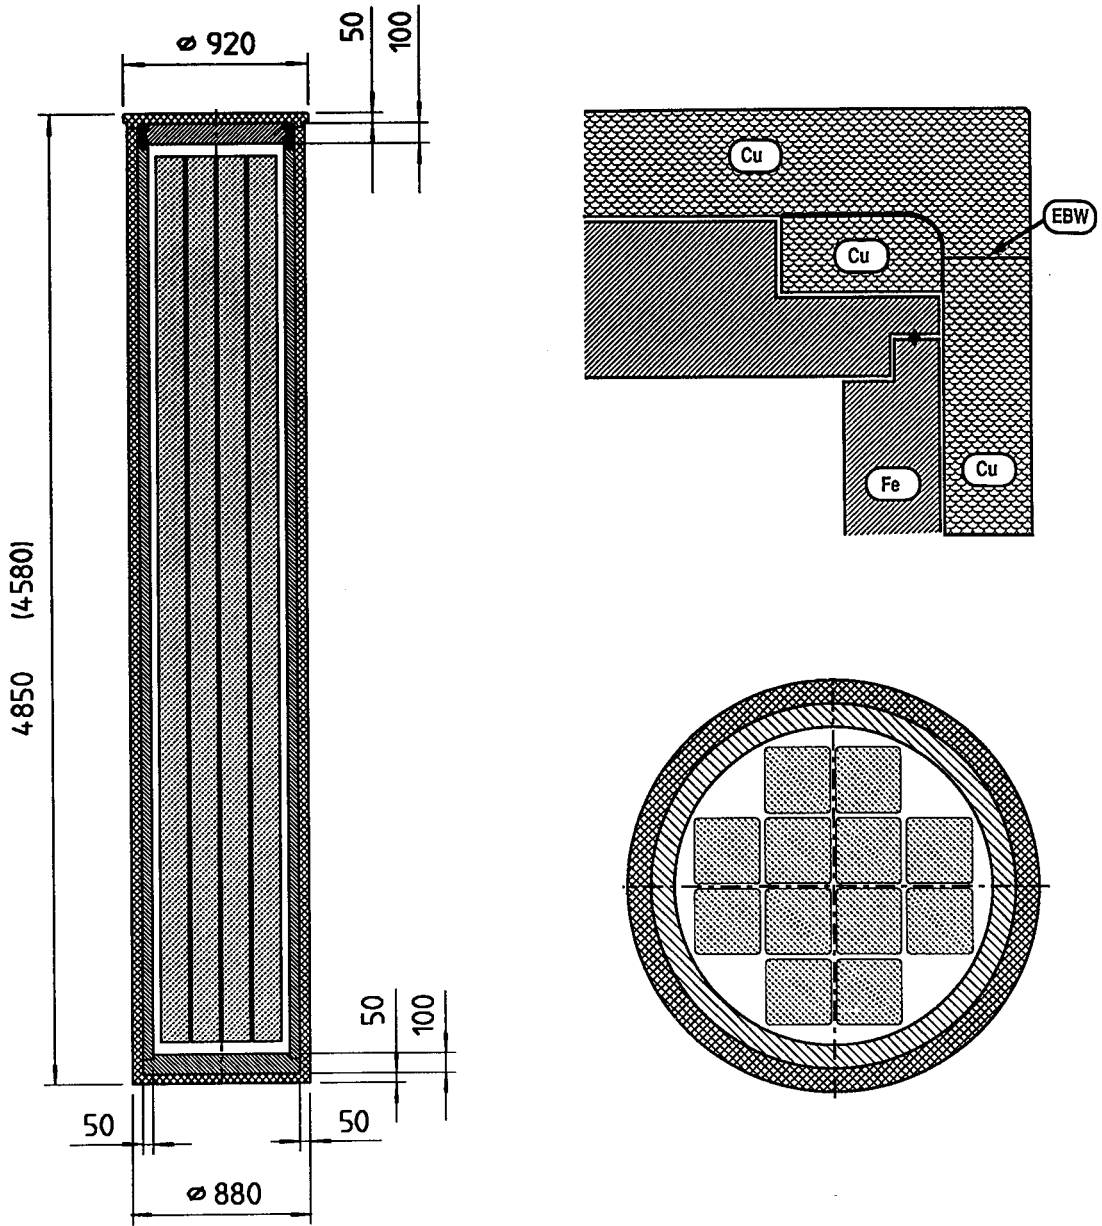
Geometry of canister. Upper right part shows blow-up of weld region. Dimensions in mm.
